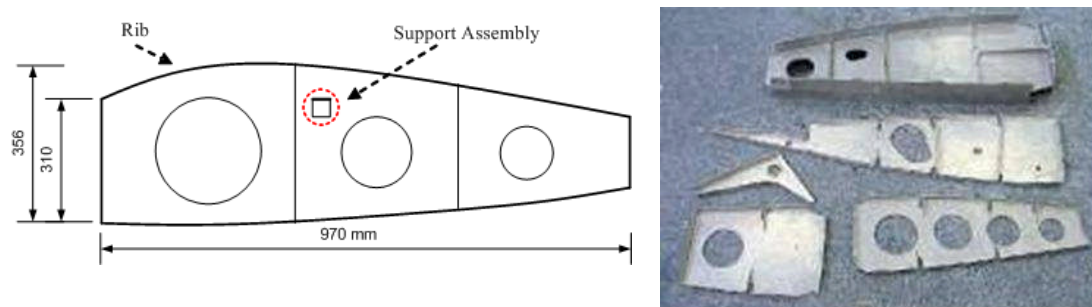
Drawing and Picture of a Typical Rib Assembly
